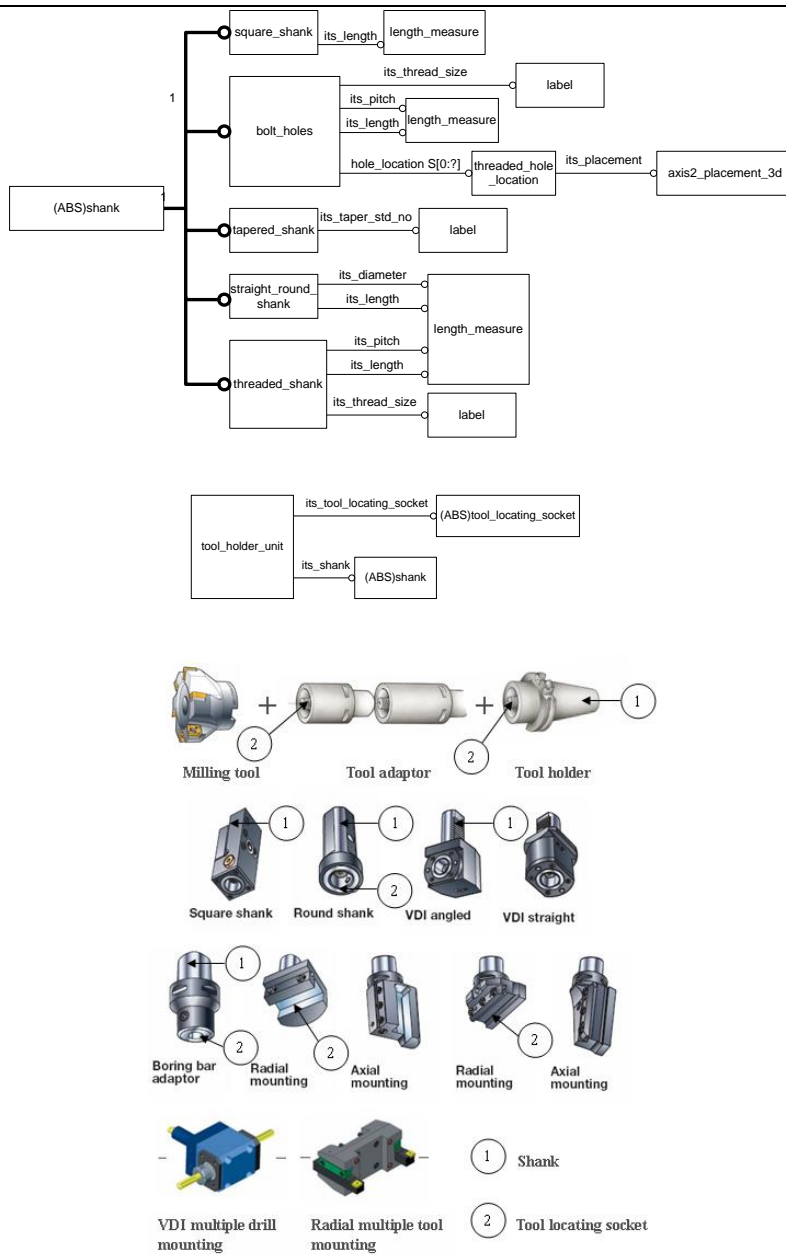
Various type of tool holder units and UMRM entities tool_holder and shank
